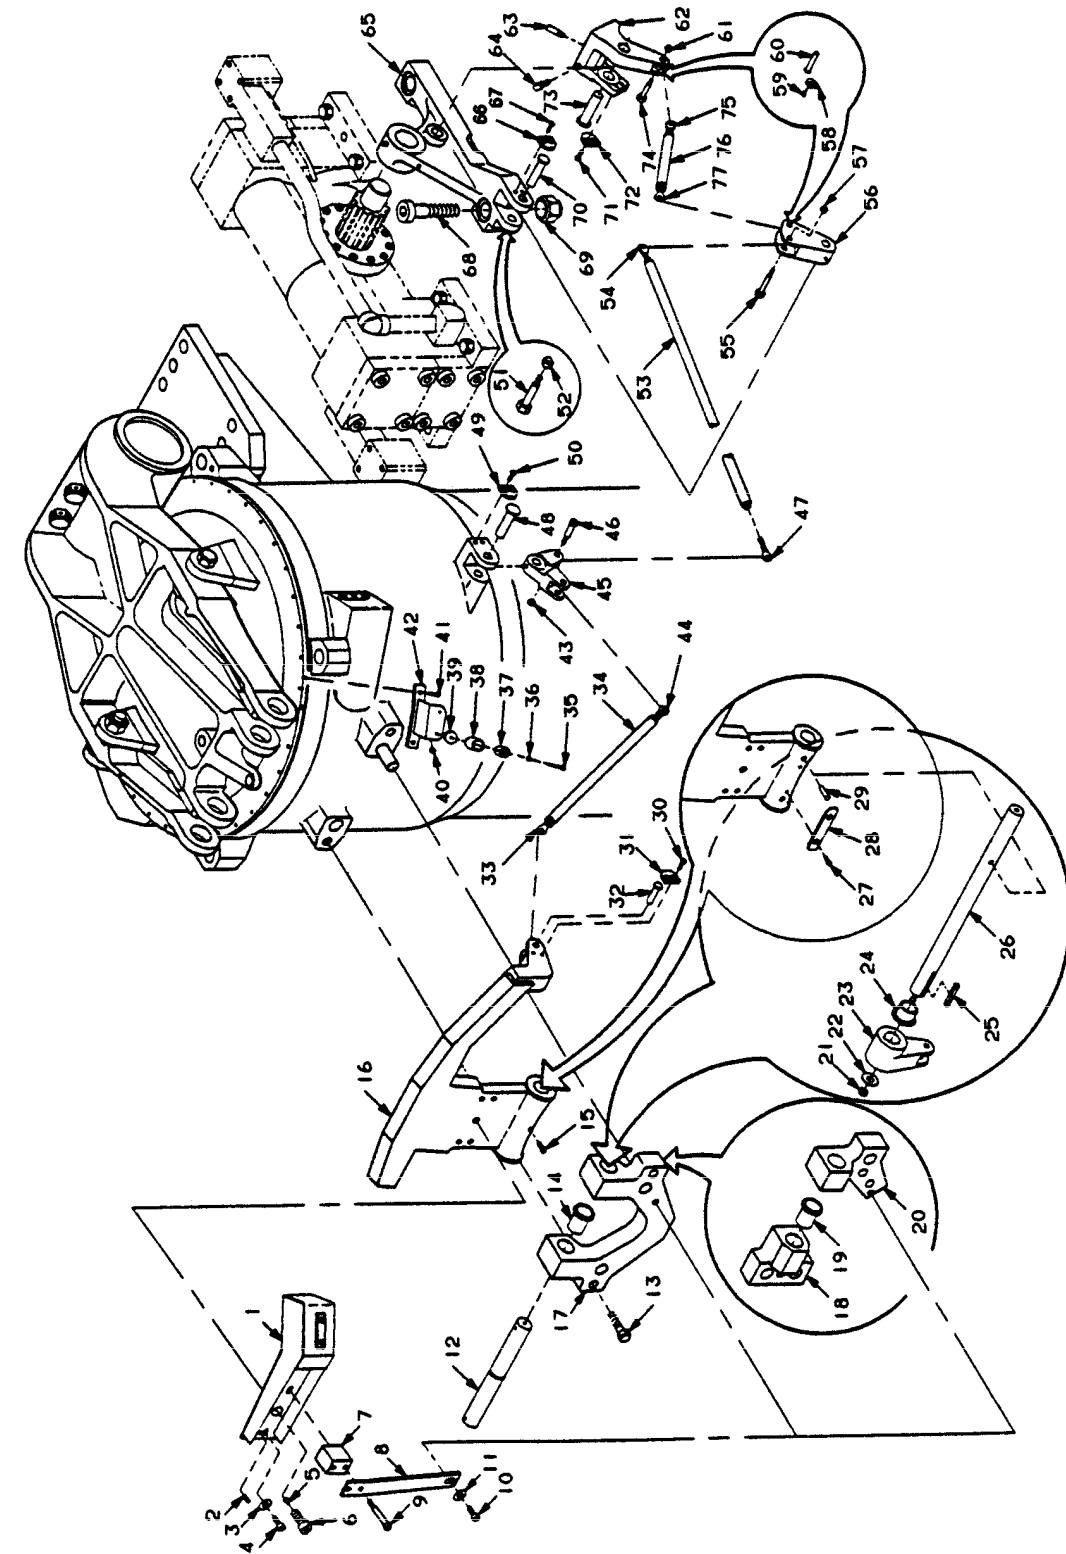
Muzzle Hatch T-Bar Locking Mechanism (SSN 719 and 720)
